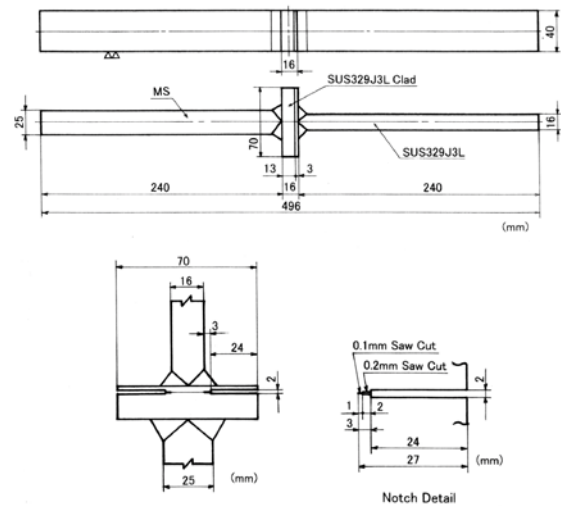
Shape and size of cruciform welded joint specimen for tensile fracture toughness test
